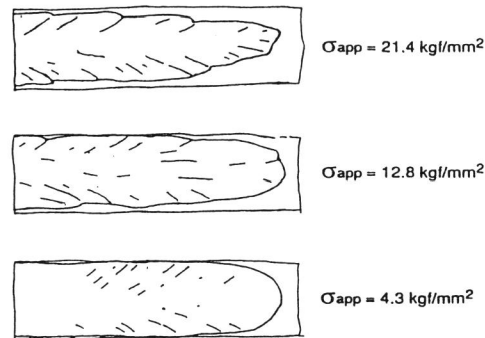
Fracture surface profiles, redrawing from [16]
